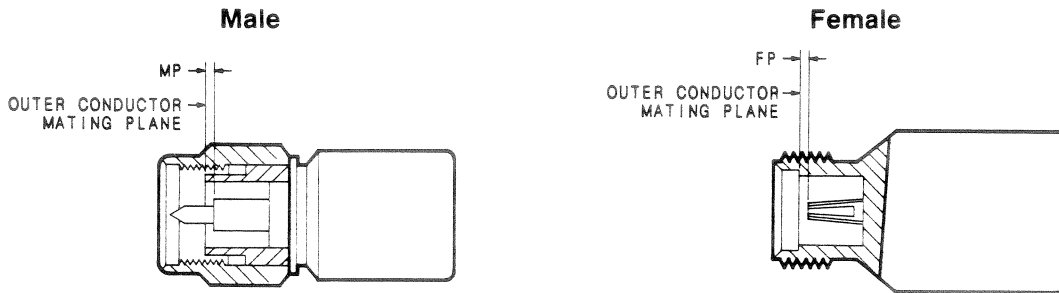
3.5 mm Short Circuit and Fixed Load Terminations
